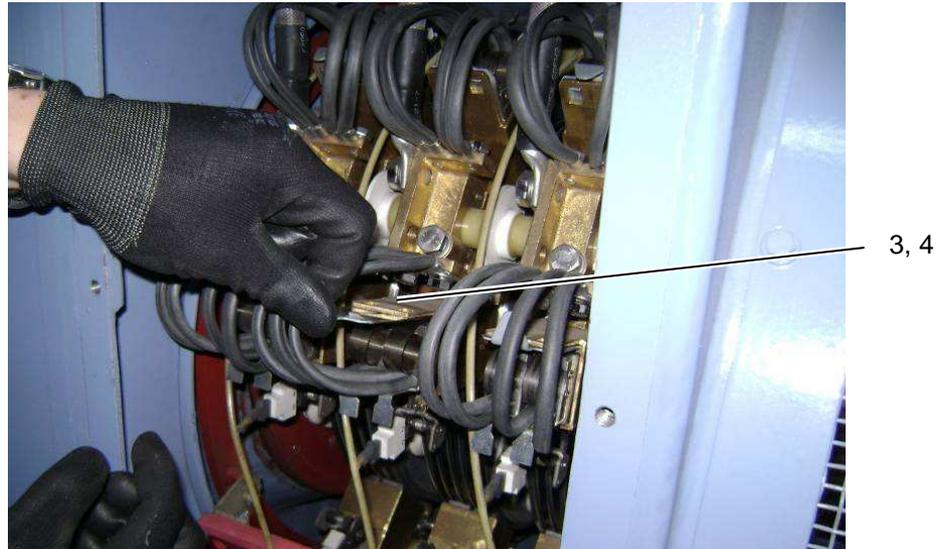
4 Removing the carbon brushes (example: VEM)
